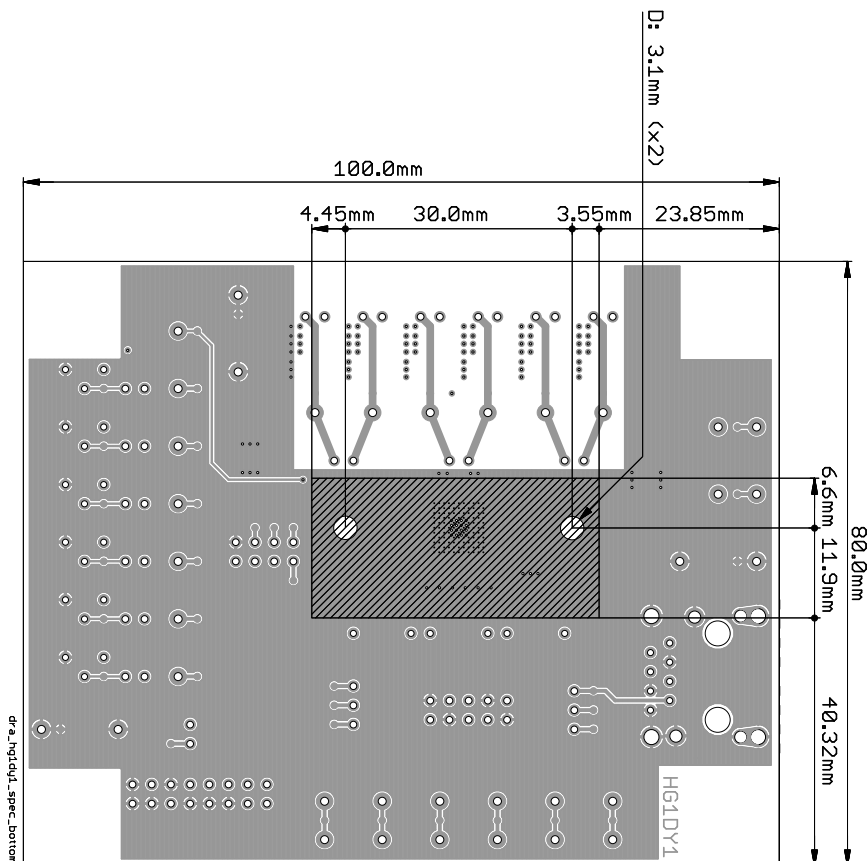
Evaluation board (solder side) with mounting option for heat sink
